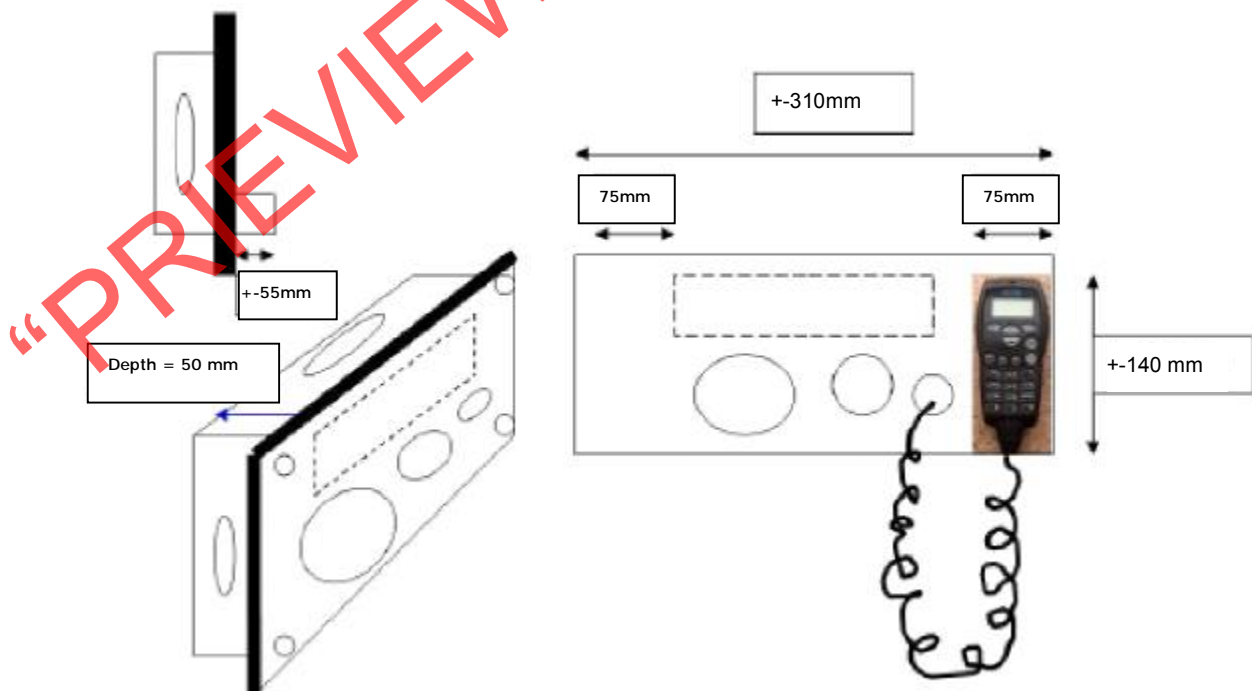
Radio Cab Unit Dimensional requirements on the Driver Console.
